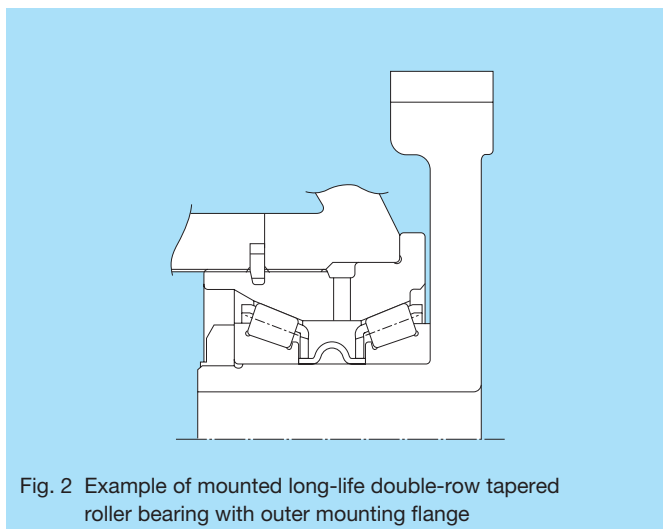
Example of mounted long-life double-row tapered roller bearing with outer mounting flange
